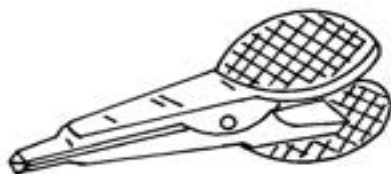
Sheet 1 : Soldering and Sleeving of Insulated Terminals
